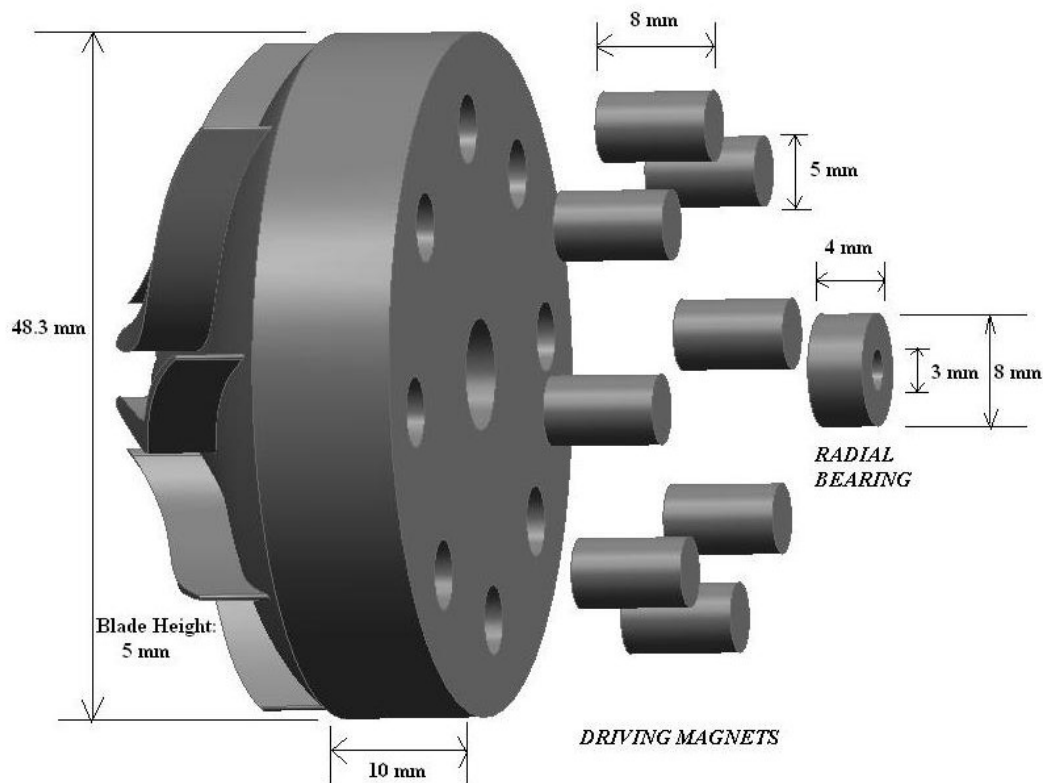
The dimensions of the impeller, the magnets and the radial bearing
